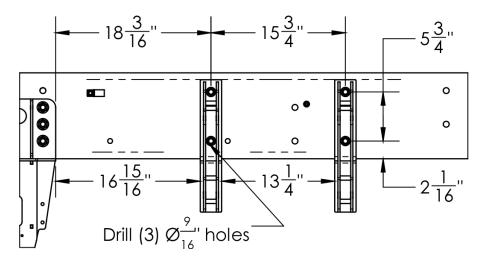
Volume Mount Drilling Location, DS150FR-SF Passenger Side.
